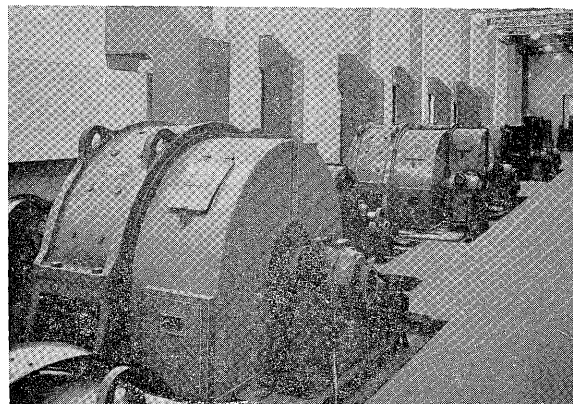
D.c. Motors for Finishing Stand of Hoop Mill
